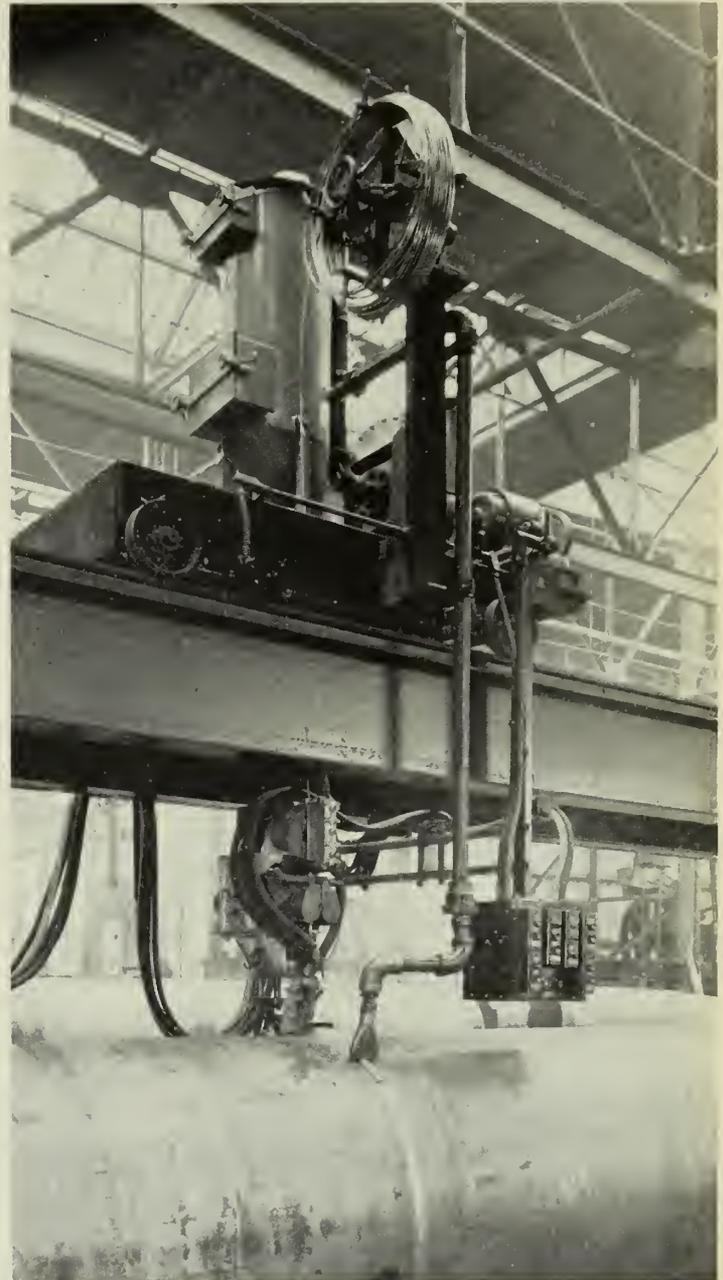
Welding Fixture for Circumferential Seams.
